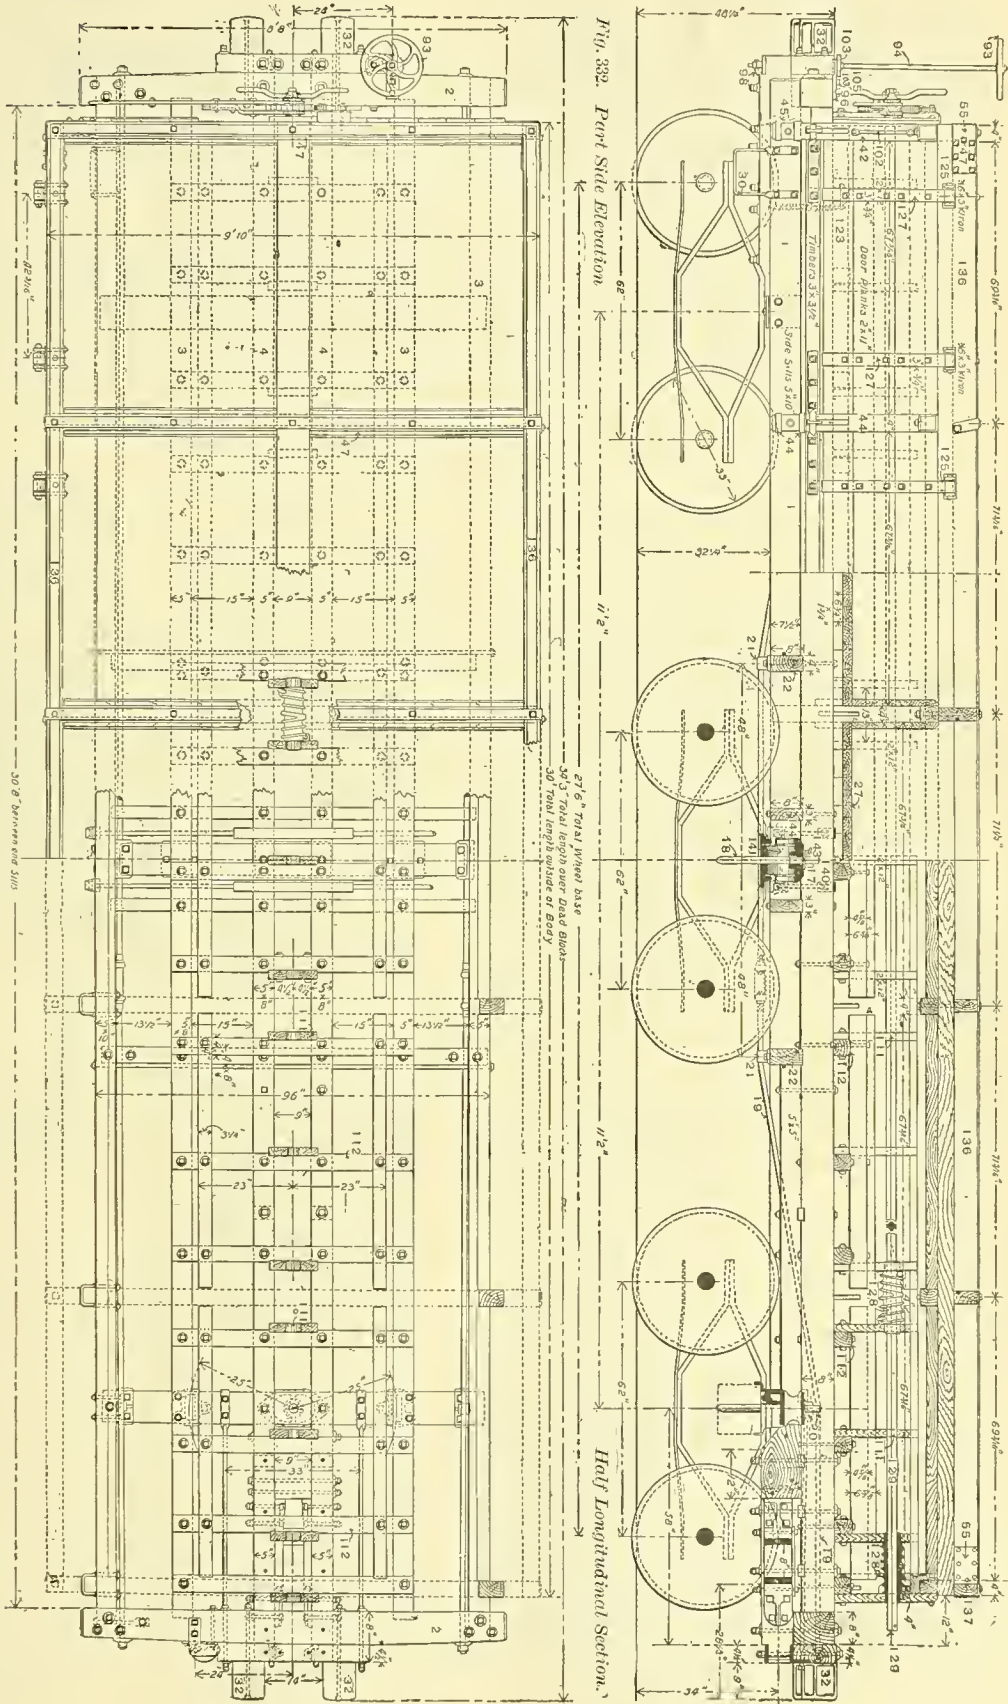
Half Plan of Floor and Half Plan of Underframe.
